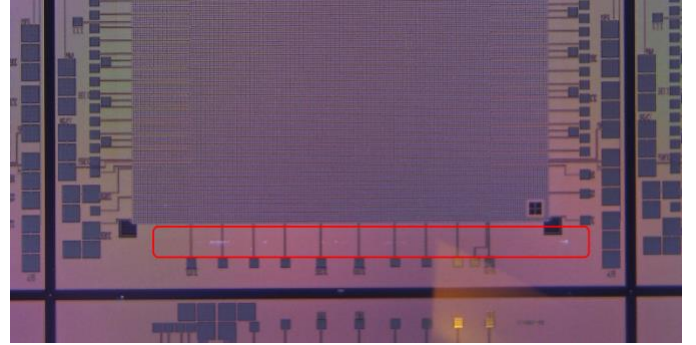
Scratch defect incurred by blade-based die removal outside the die footprint
